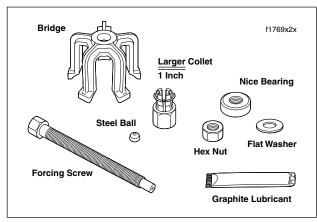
Rear Wheel Bearing Remover Tools (Part No. HD-44060)
